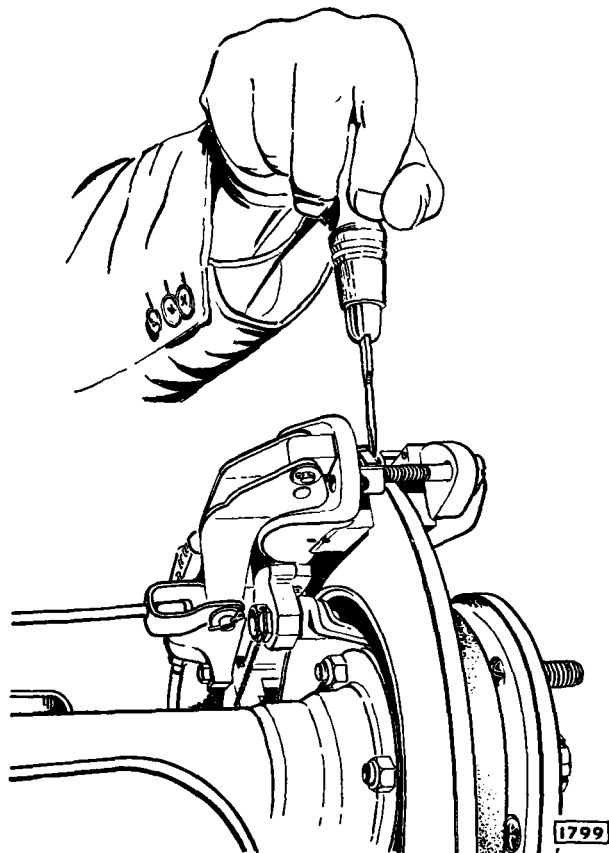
Preloading the spring by inserting a screwdriver blade between the squared nut and retaining cage, the adjuster bolt is then screwed in so that it engages the self-locking nut with the first turn.
